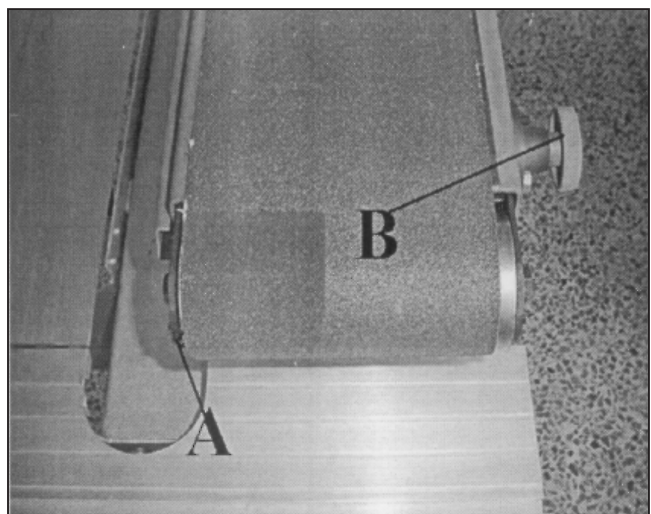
Adjust the screw A and knob B to have the sanding machine run between the rollers.
